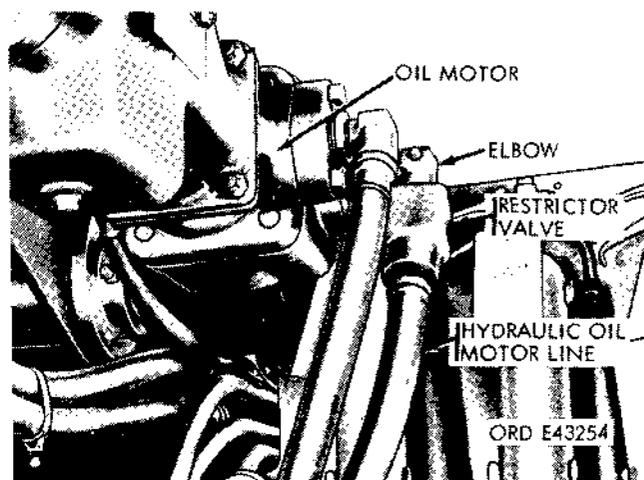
Hydraulic oil motor lines and restrictor valve.
